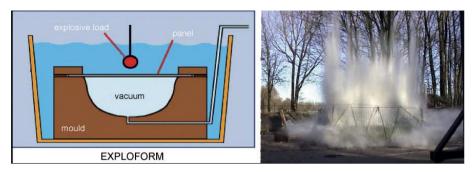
Scheme of exploform process (courtesy: www.exploform.com)
